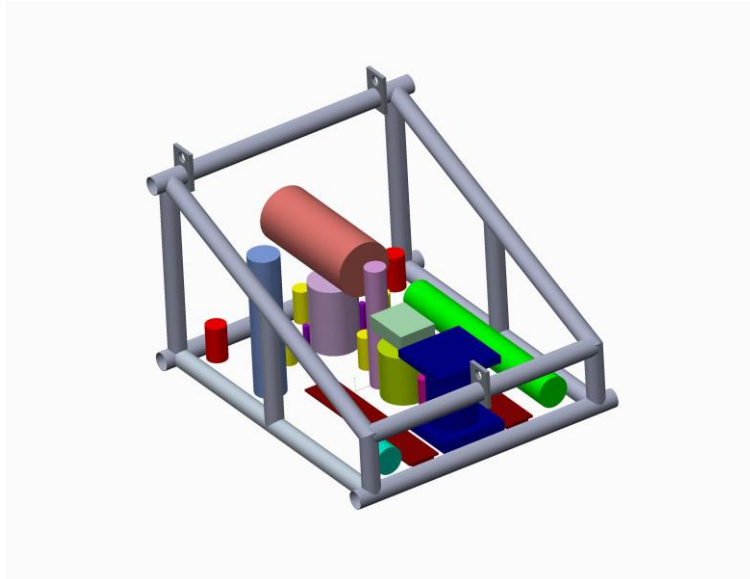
CAD drawing of the TOV frame with all of the components placed appropriately. To see the itemized list of components, refer to Appendix B
